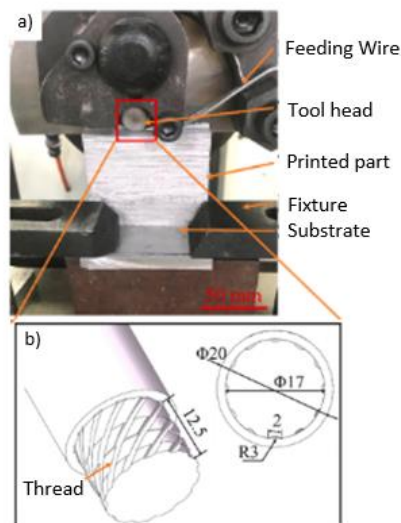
FRAM process equipment: a) in operation b) tool head [2].
